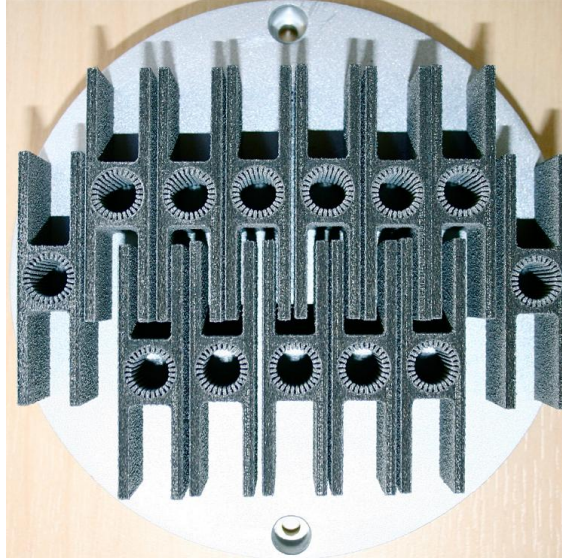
34 thirteen axially grooved AL6061 heat pipes on a substrate plate made by SLM
